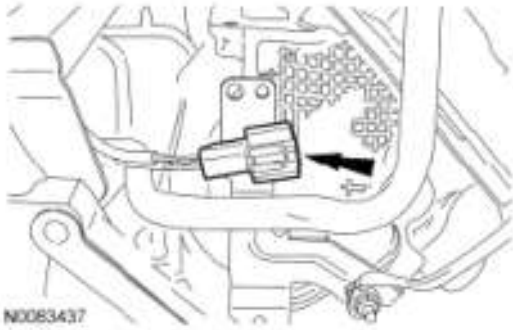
Locating Cylinder Head Temperature (CHT) Sensor Electrical Connector
